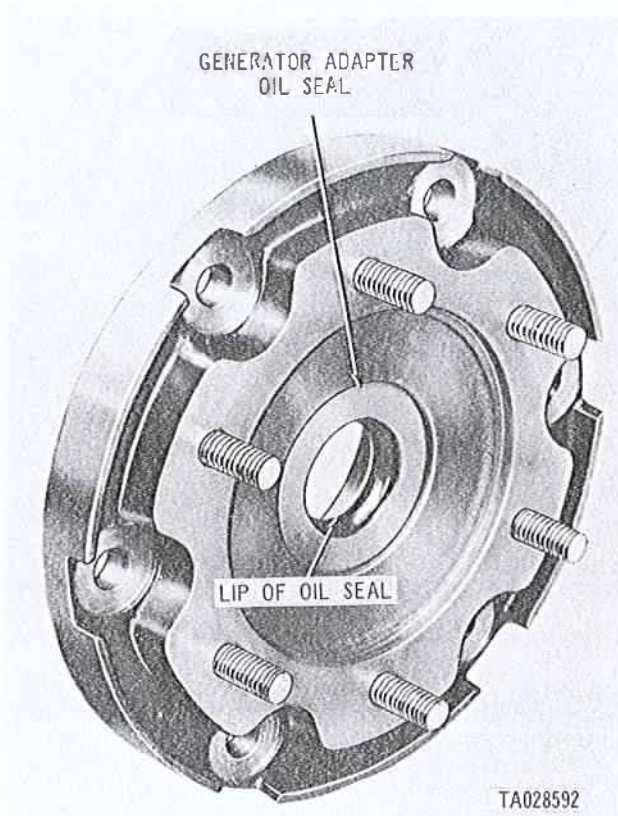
Removing generator adapter oil seal, model AVDS-1790-2D and AVDS-1790-2DR engines.
